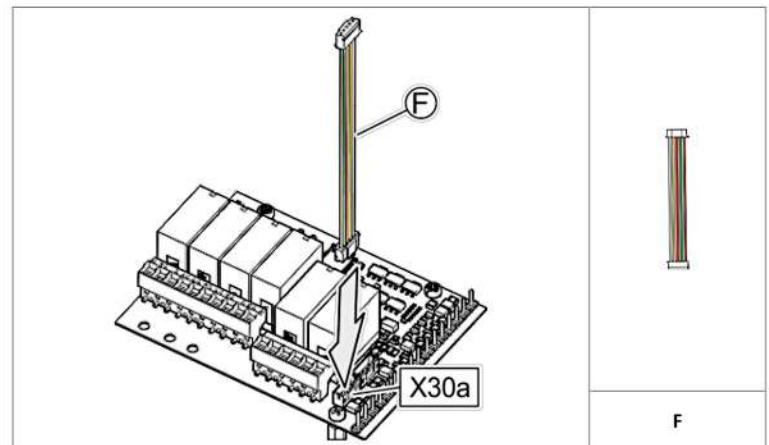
Assembly using the example of the TST RFUxIO-E
